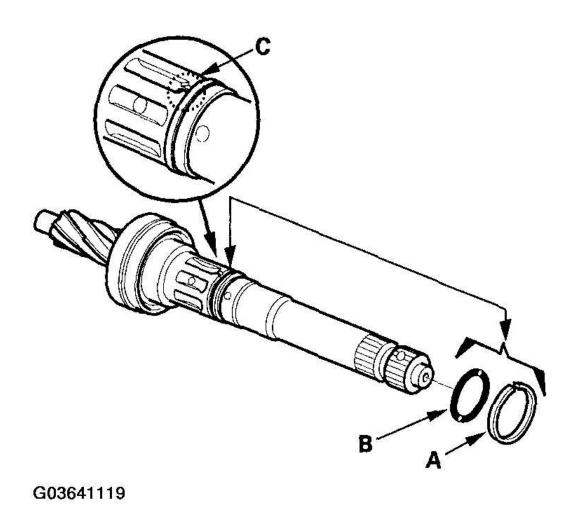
Removing Valve Seal Ring And O-Ring Courtesy of AMERICAN HONDA MOTOR CO., INC.
